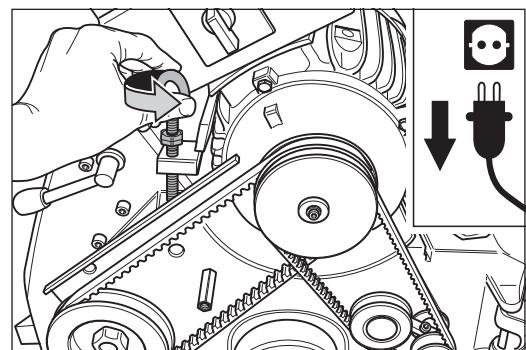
Release the V-belt tension by loosening the tensioning bolt at the motor.
